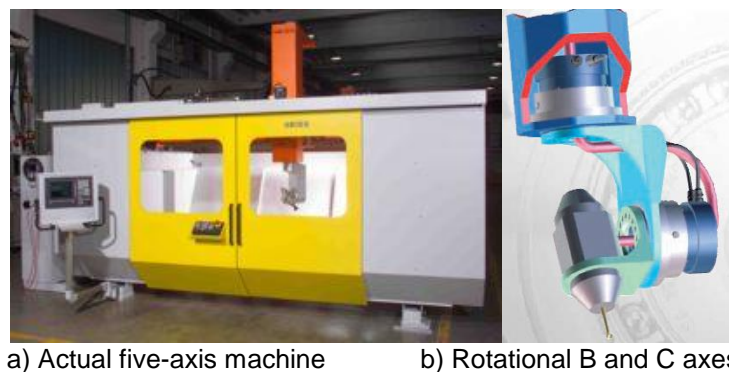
Actual five-axis machine and the rotational B and C axes.
